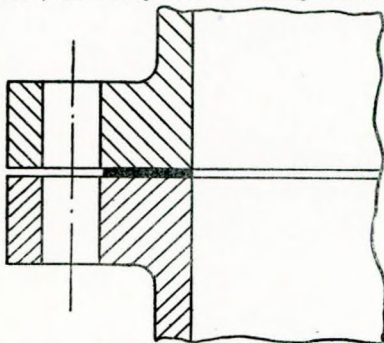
Section of flanged pipe joint fitted with a flat joint ring.
